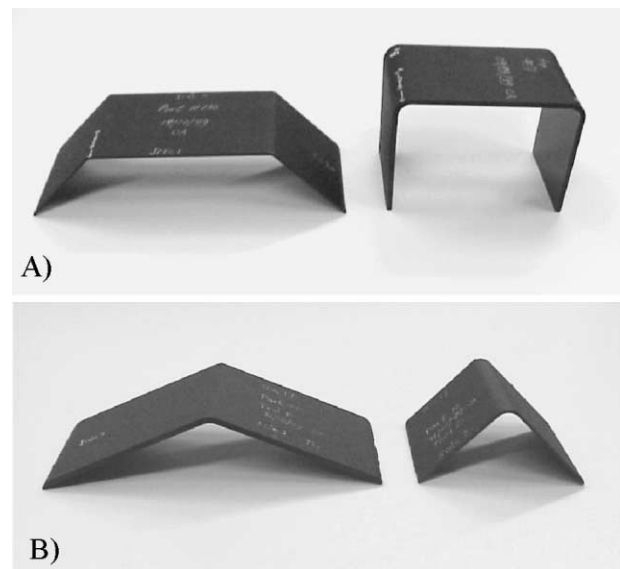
Photographs of composite parts prepared in this study: (a) C-shaped parts, (b) L-shaped parts.
